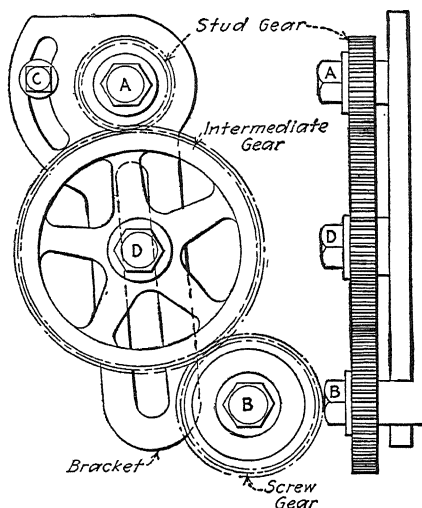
Change-gear train showing intermediate gear bracket or “quadrant.” When changing gears, first put reverse handle in neutral to avoid any chance of the gears moving if the lathe should be started accidentally. Then loosen the nuts *A* and *B*, then the binding screw *C*, and finally the nut *D*, being careful not to let the intermediate fall too hard against the bottom of the bracket. When the gears on the stud or screw or on both are changed as desired, lift the intermediate to engage the stud gear, pinching a piece of paper between them to allow for clearance, and tighten *D*, then swing the bracket to pinch paper between the intermediate and the screw gear and tighten *C*.
